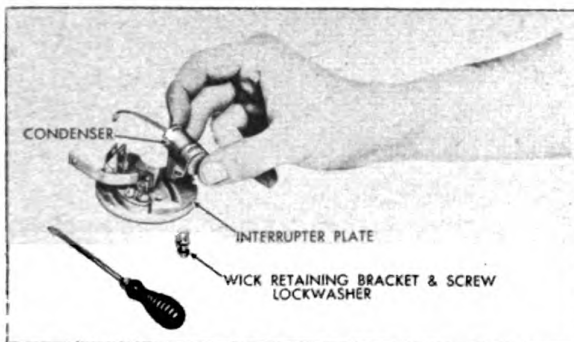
Interrupter Plate Condenser and Wick Assembly.
